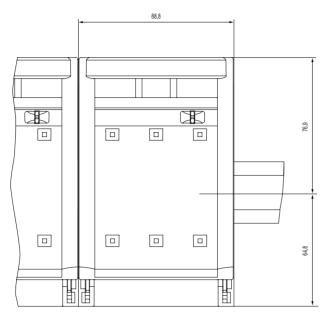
Dimensional drawing: Mounting onto standard rail, 3NP1 size 000
